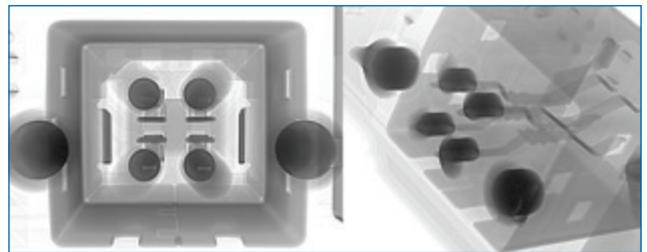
X-ray images of through-hole components selectively soldered with a low-temperature solder alloy after thermal cycling.
